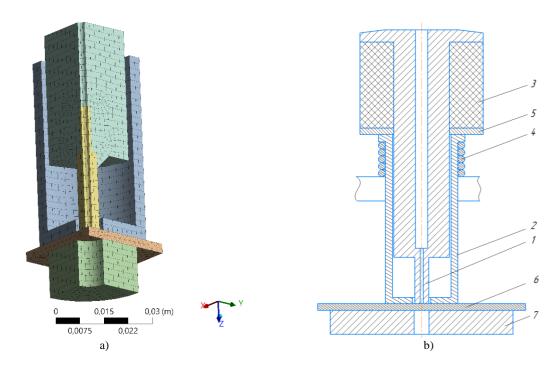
Finite element model of the tool (a) and punching scheme (b): 1 – punch; 2 – punch holder; 3 – buffer; 4 – spring; 5 – washer; 6 – workpiece; 7 – die
